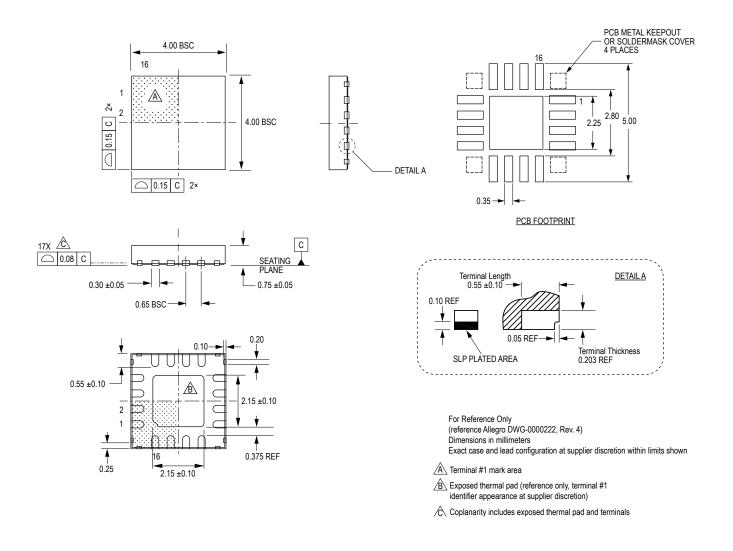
EU Package, 16-Lead QFN with Exposed Thermal Pad and Wettable Flank
